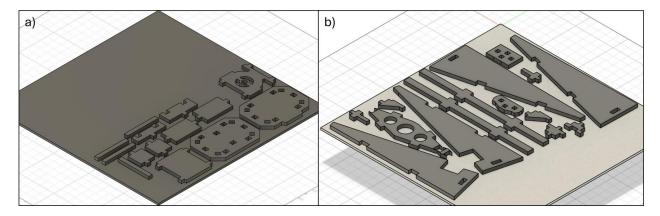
Images of product components laid out on the workpiece a) Pokecenter b) Aircraft
